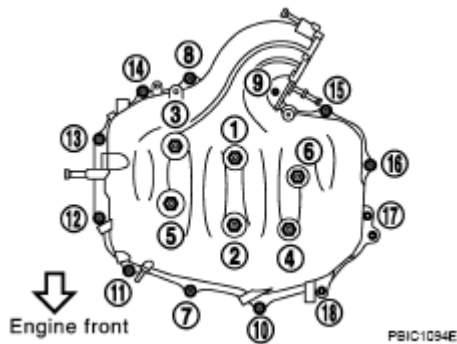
Identifying Intake Manifold Collector (Upper) Bolts Tightening Sequence
